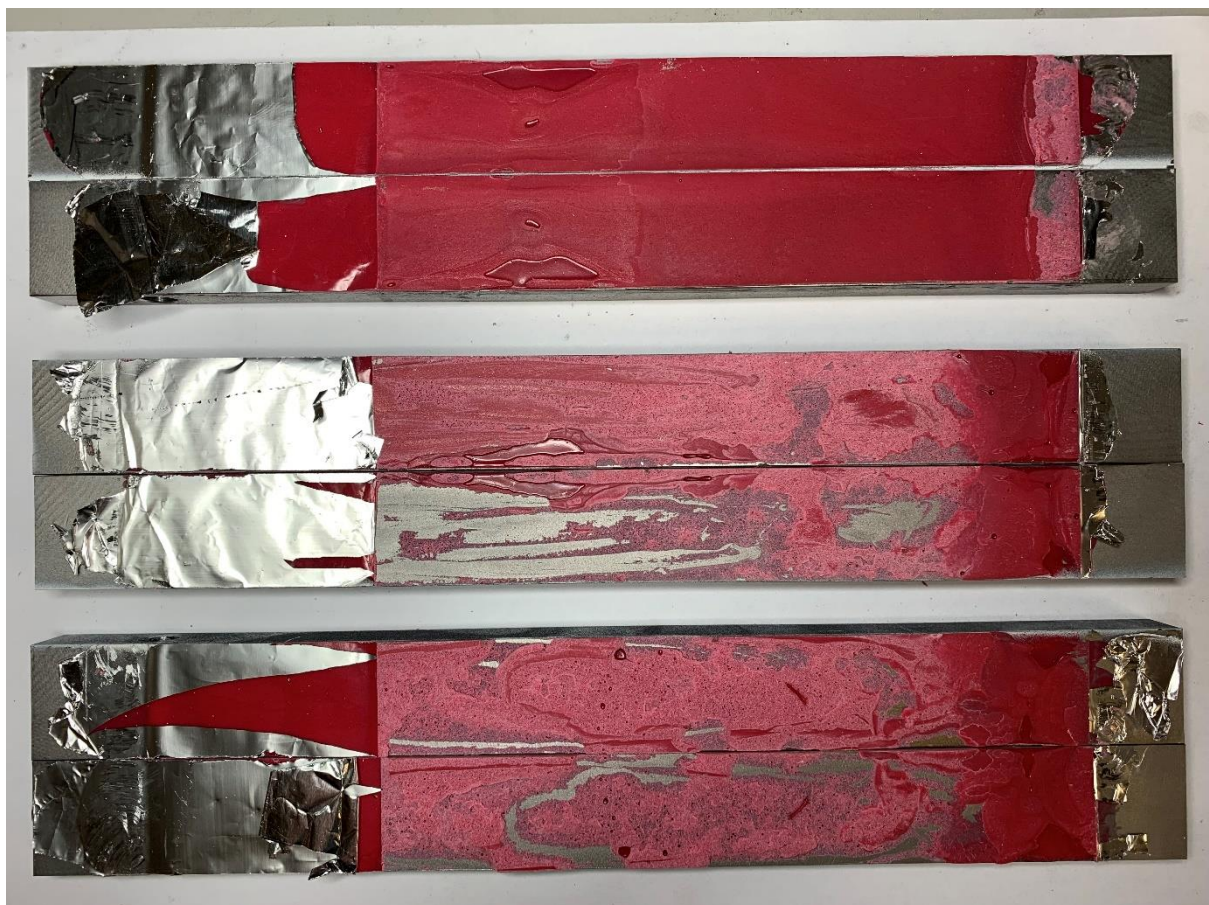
Fracture surfaces T1.1 (A - B - C)
